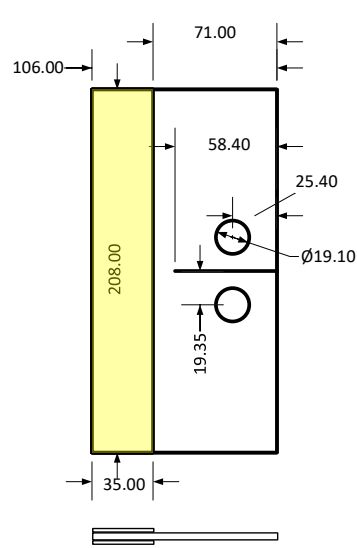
SOCT specimen dimensions, all dimensions in mm.
